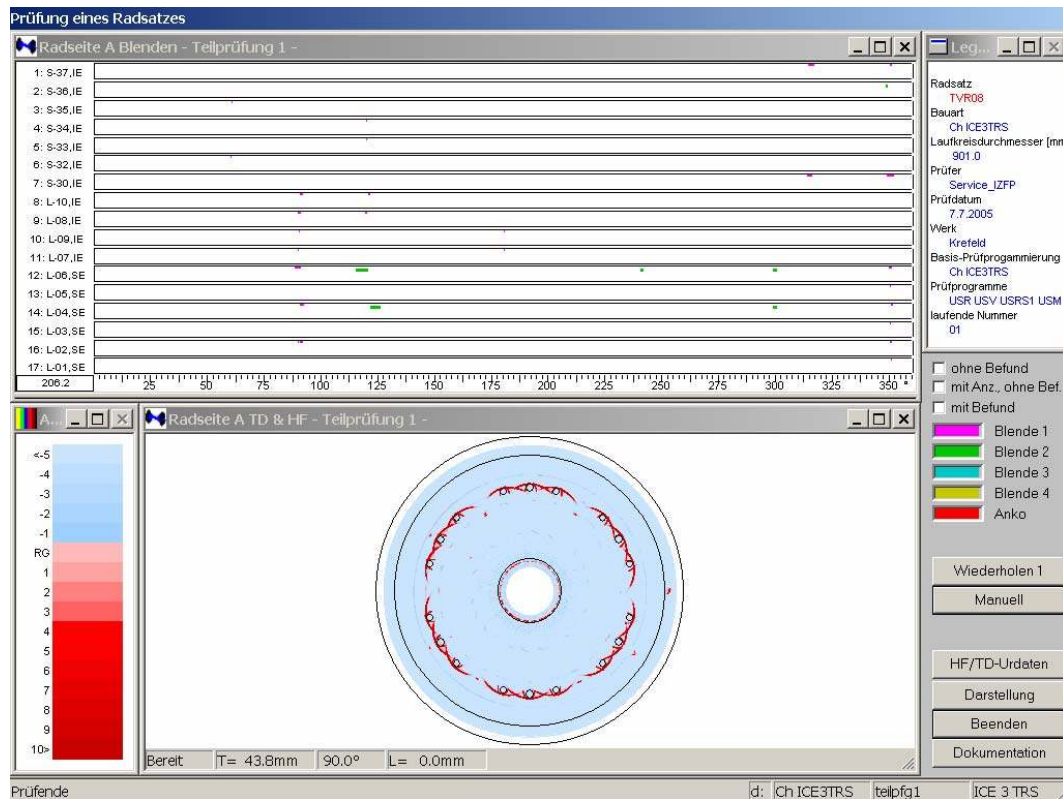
Result Display after Wheel Rim and Disk Inspection of an ICE 3 Drive Wheel
